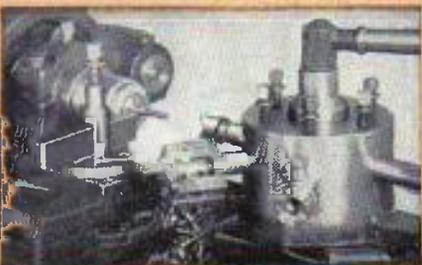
Manufacturing Small Parts Using the Draw-in Collet Chuck and Turret.
